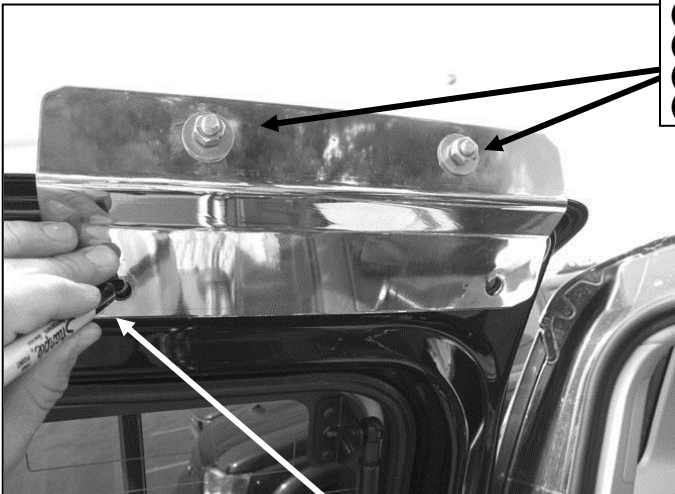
Metal inserts will be flush with sheet metal when properly installed
